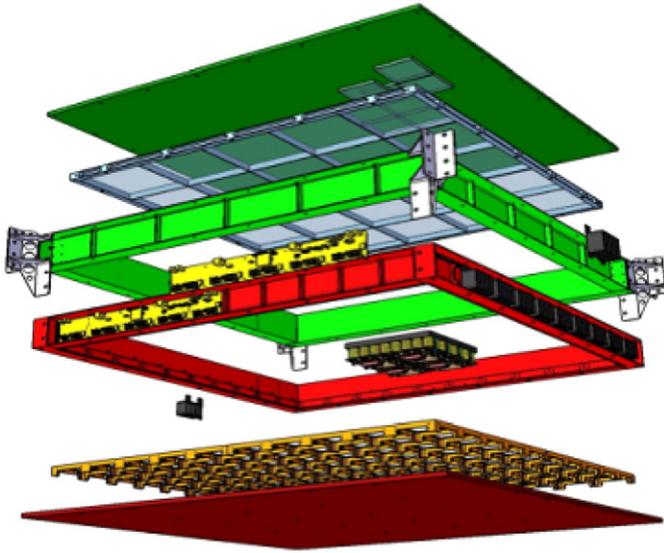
Exploded CAD view of the CHERCAM mechanical structure.
